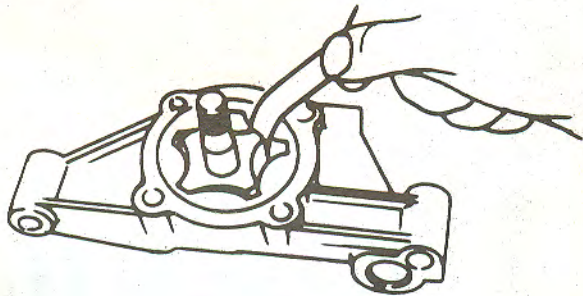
Checking the tip clearance between the two rotors. Turn the rotors in the position shown before inserting the gauge.
